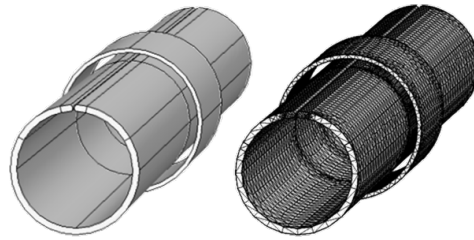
Geometry and mesh for the formed steel sheet plus the full body coil.
